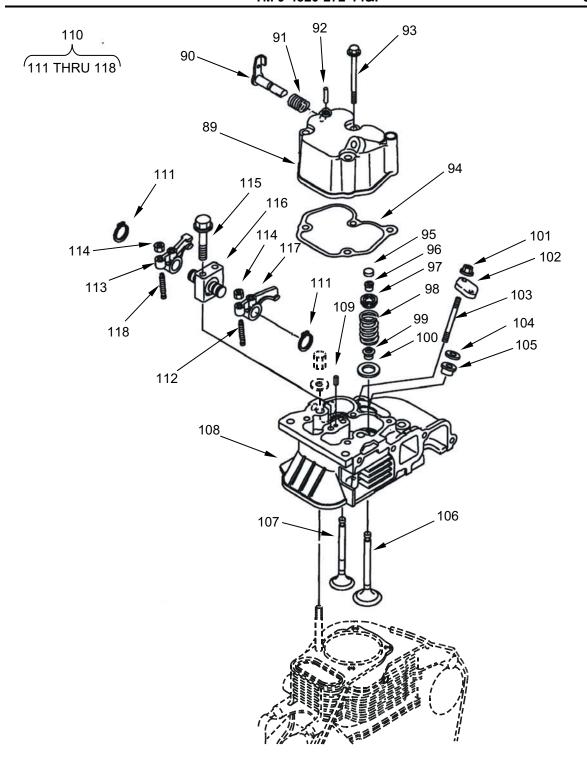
Engine, Diesel (Sheet 5 of 9) (Cylinder Head and Bonnet).
